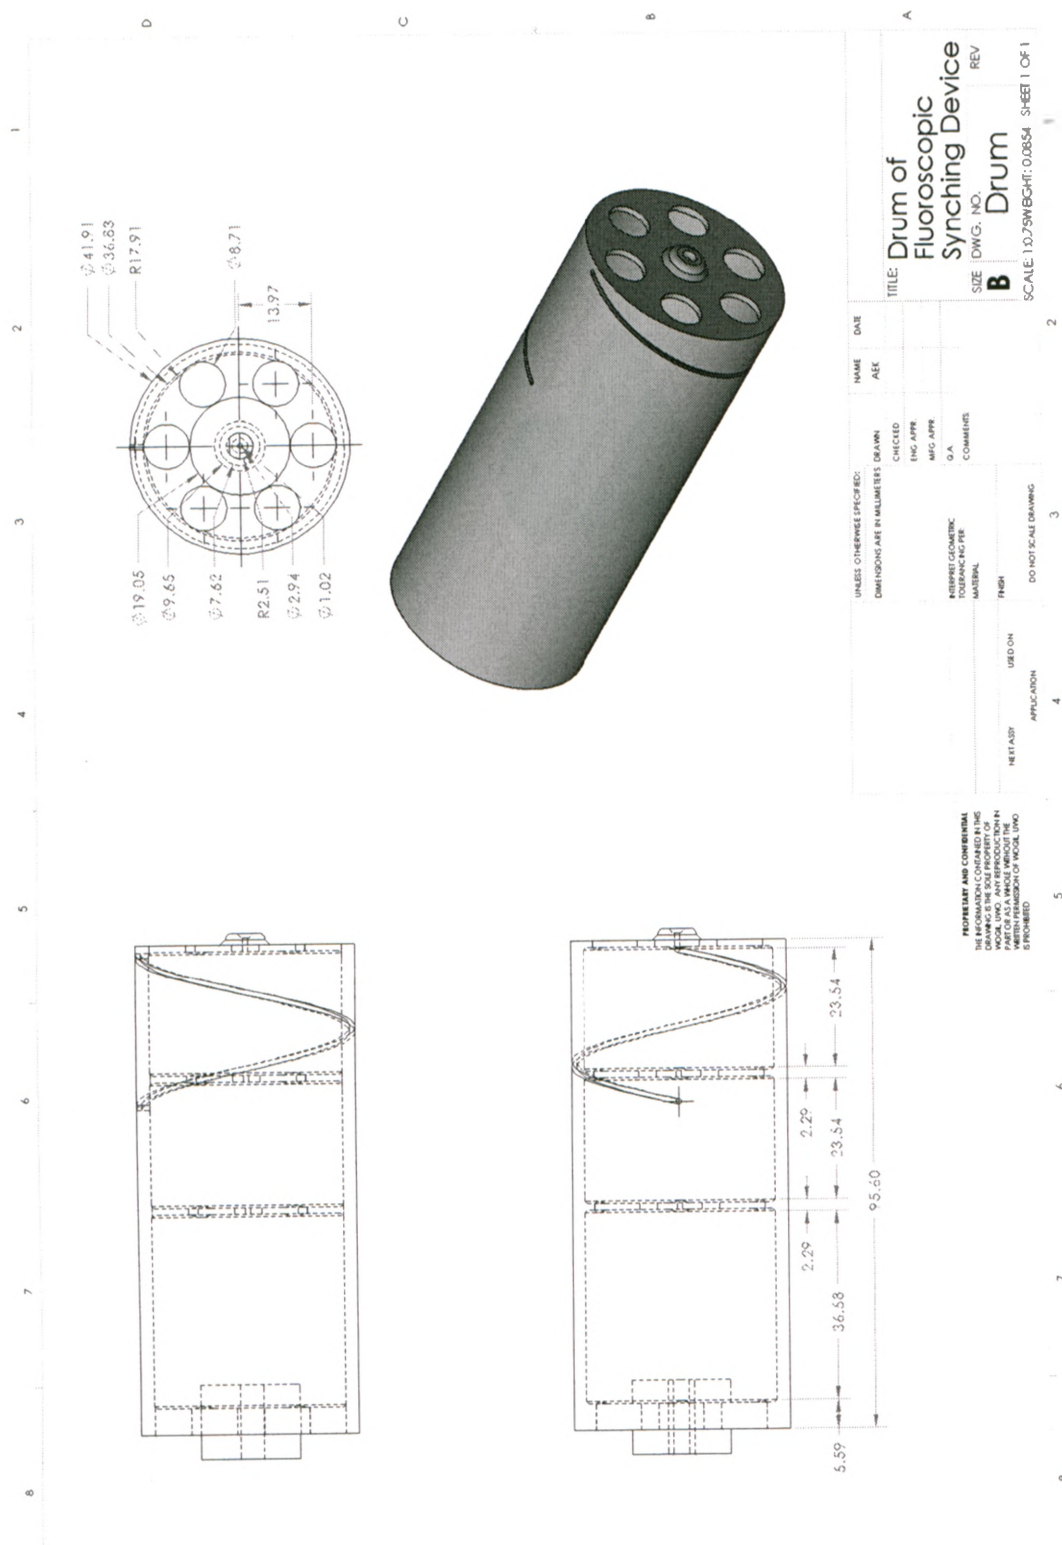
Schematic drawing of the drum of the fluoroscopic synching device
